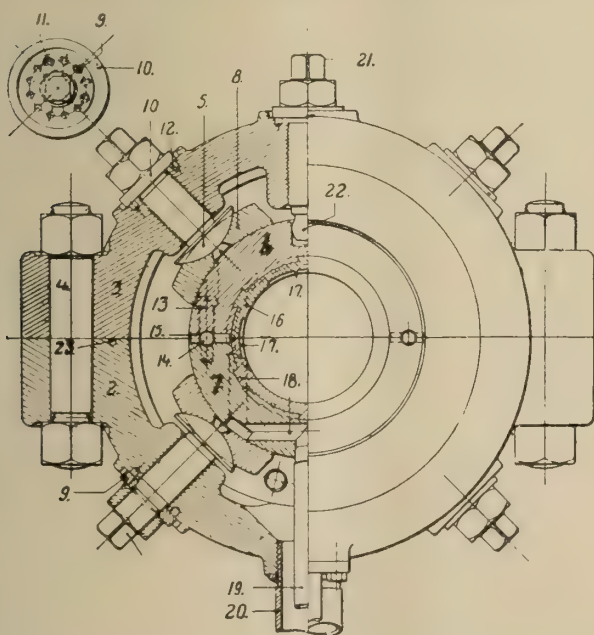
CROSS SECTION OF SHAFT BEARING.
